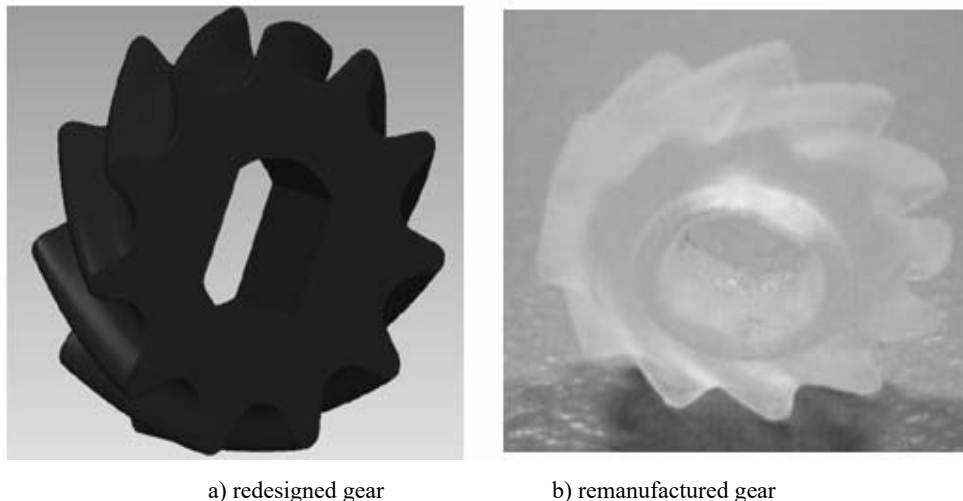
Redesigned and remanufactured gear [9, 10].
